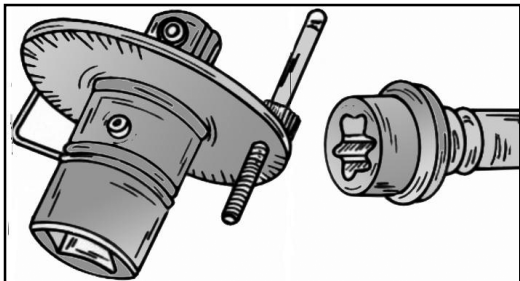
A graduated disc is used to “angle-tighten” nuts and bolts. “Torx” head bolts are shown on the R.H. side.
